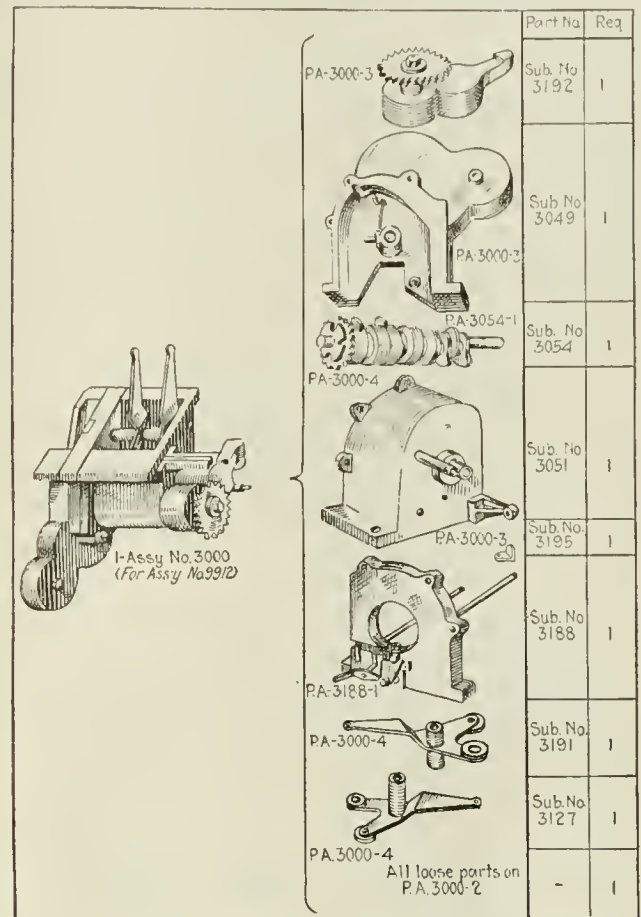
PICTORIAL ASSEMBLY OF CONTROLLER UNIT
